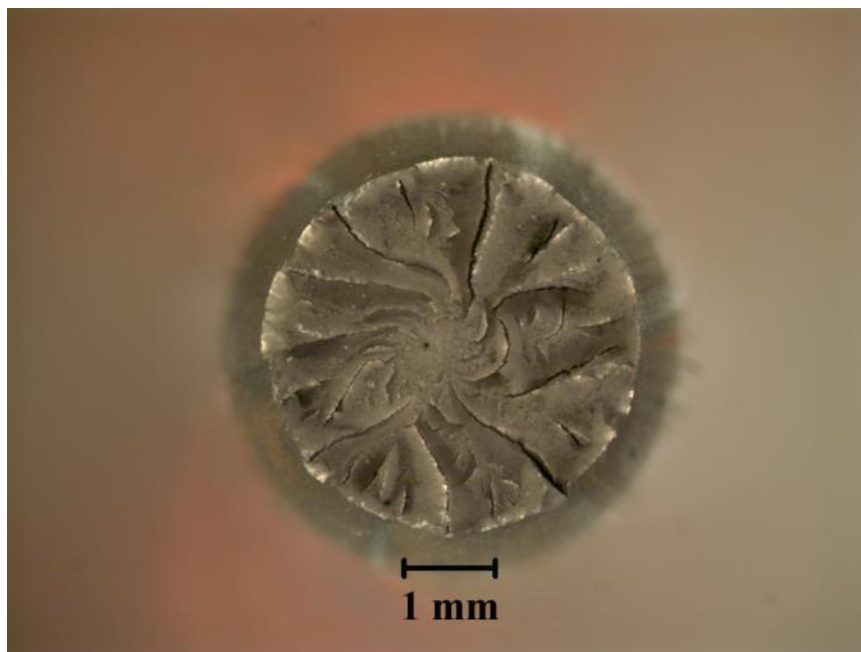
Fracture surface of 1080 prestressing steel
